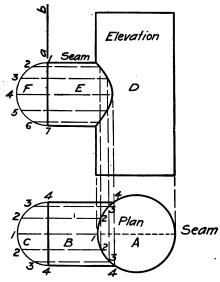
Plan and Elevation for Right Angled Pipe Joint.
